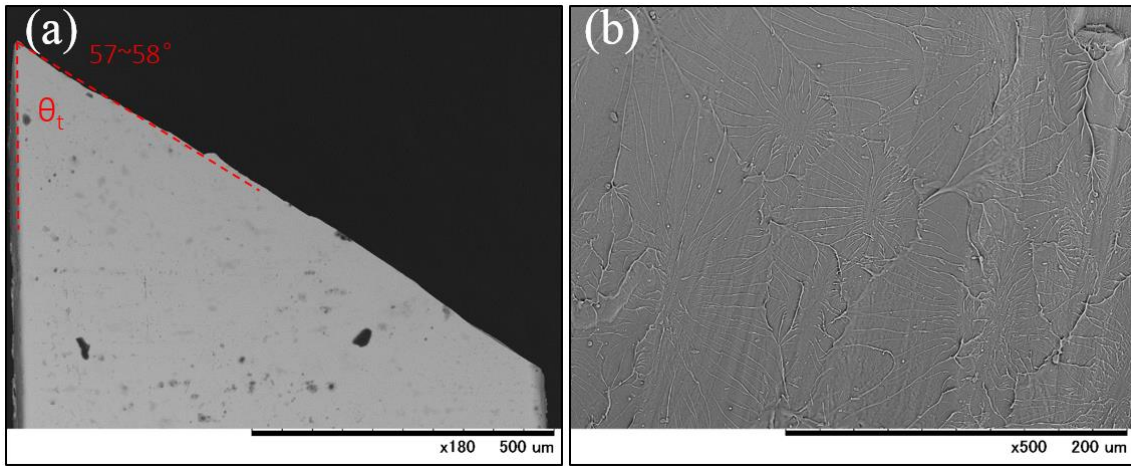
Fracture morphology of the as-cast Zr65 MG on the side-view (a) and on the fracture surface (b).
